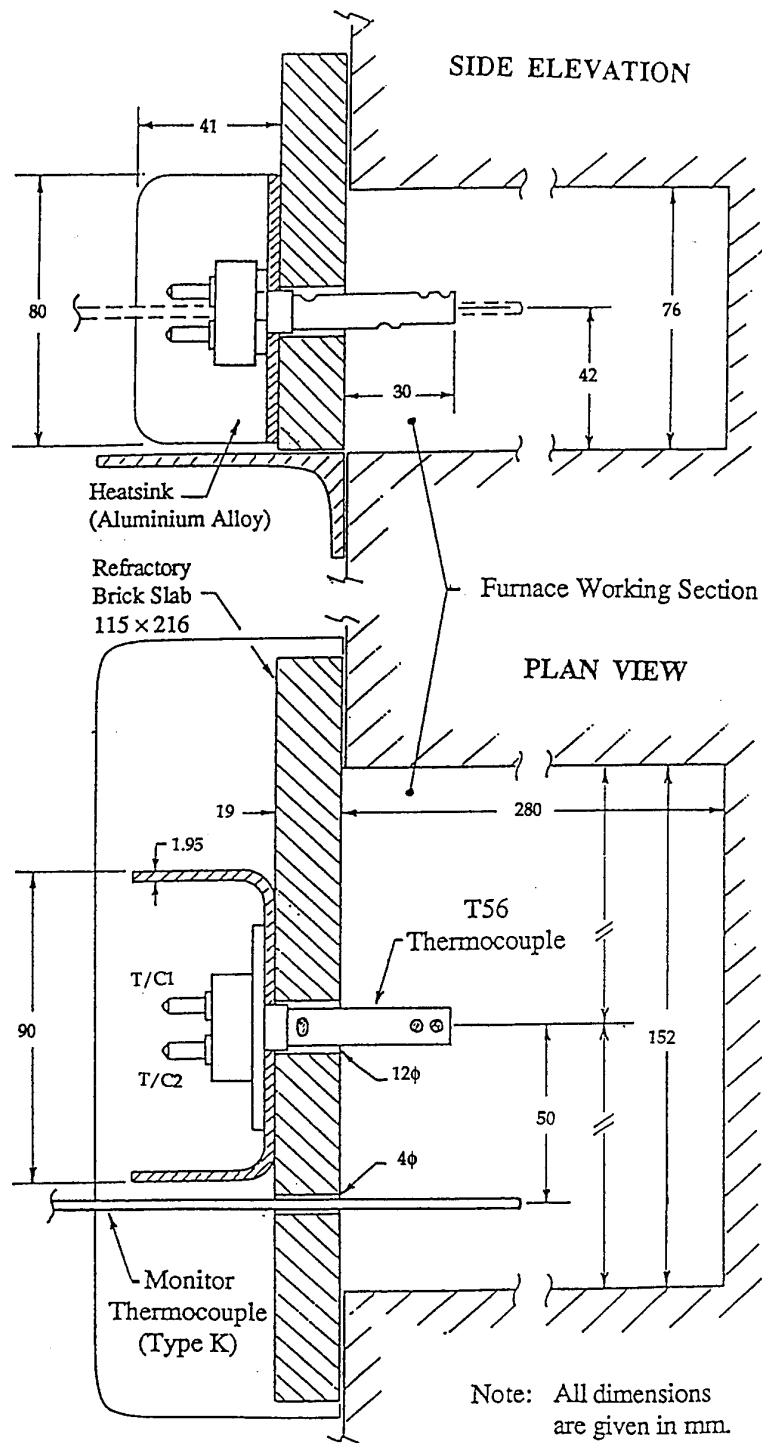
Method of Mounting Thermocouple Probe in Electric Furnace
